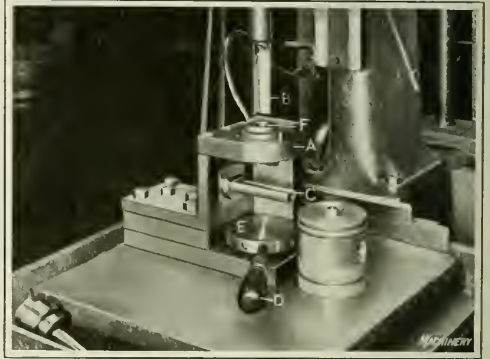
Drilling Machine equipped with Special Milling Cutter for facing off the Boss on the Closed End of the Piston
